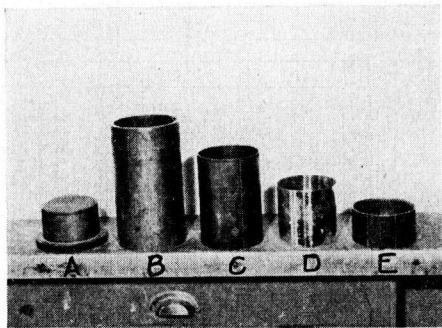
Parts of Mold Assembly. A, Base Plate. B, Outer Cylinder. C, Flexible Split Steel Liner, Recessed to Accommodate Tinned Jacket. D,  $\frac{1}{4}$ -in. Inside Diameter. E, Section of Split Ring Inserted After Jacket is in Place.
